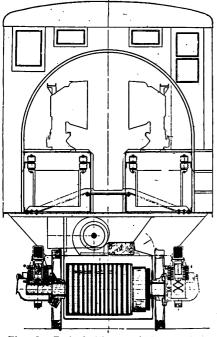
End Outline and Motor Cross Section of New Gearless Locomotive.
